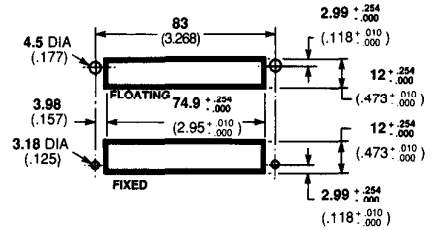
RACK MOUNTING, WITH MOUNTING HOLE PATTERNS
